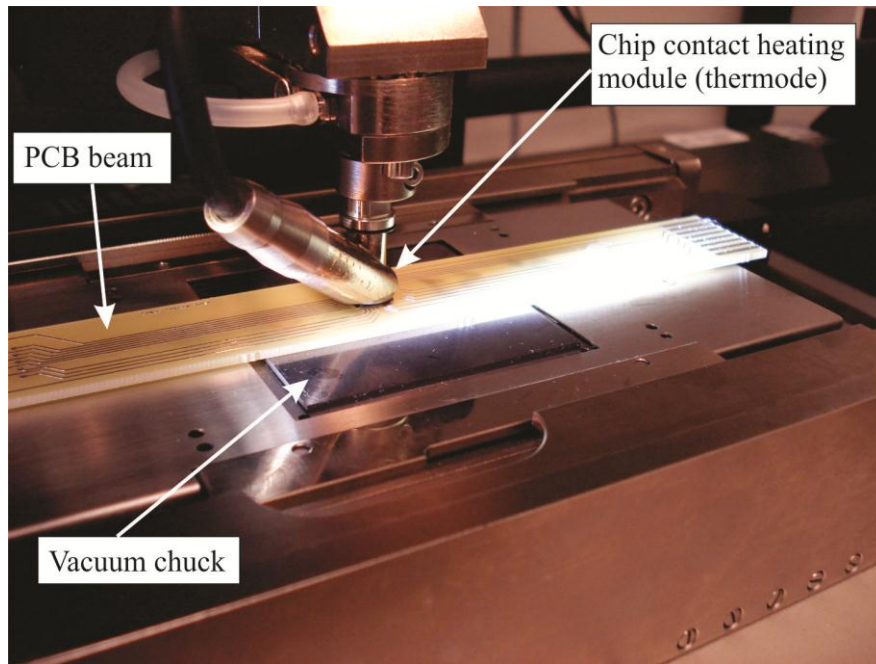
Image showing the flip-chipping process of the chip on the PCB beam
